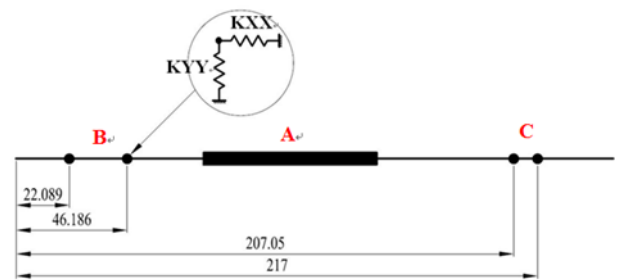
Schematic diagram of the rotor-shaft-bearing system.
